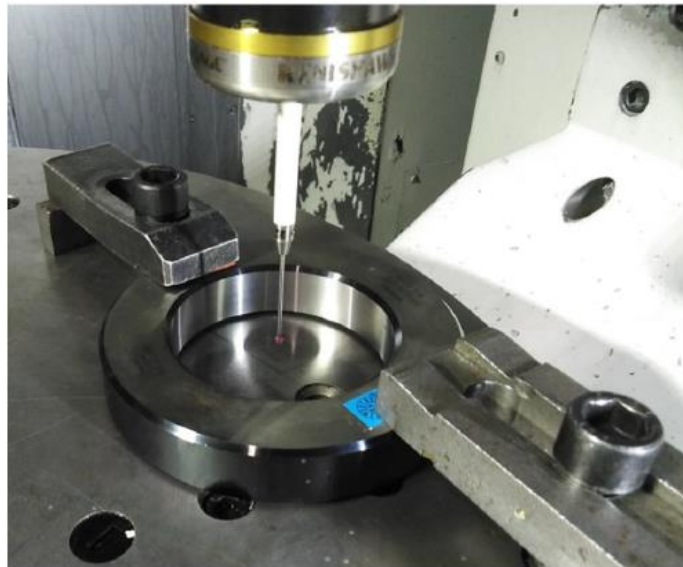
Measuring the diameter of the ring gauge on a machine tool with a standard touch probe.
